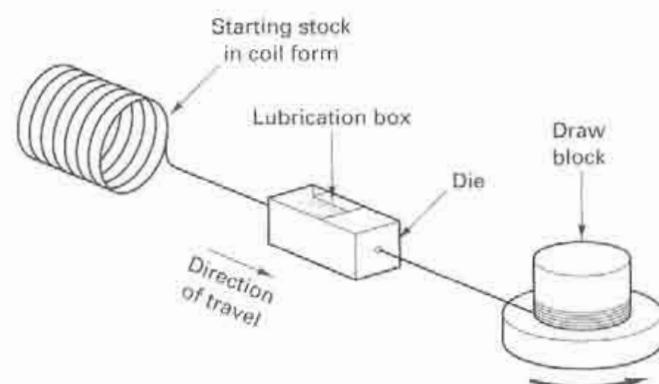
Schematic of wire drawing with a rotating draw block. The rotating motor on the draw block provides a continuous pull on the incoming wire.
